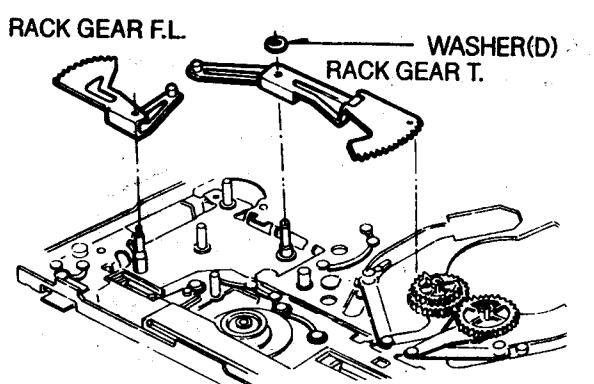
Rack Gear F.L./Rack Gear T
